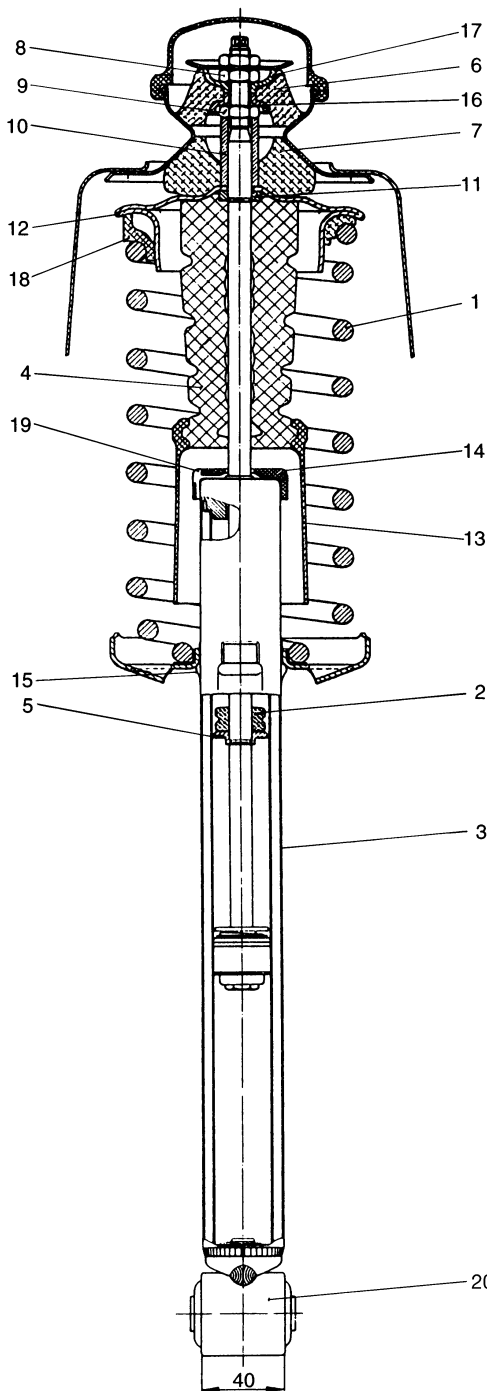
Sachs rear spring damper on the VW Golf (III, 1996) and Vento with coil spring 1 and jounce stop 2 visible in the cross-section. This is carried by the 11 mm thick piston rod and is located 107 mm above the 27 mm diameter piston so that it has an adequate minimum bearing span in the fully extended condition; the stop ring 5 is rolled into a groove of the piston rod.
